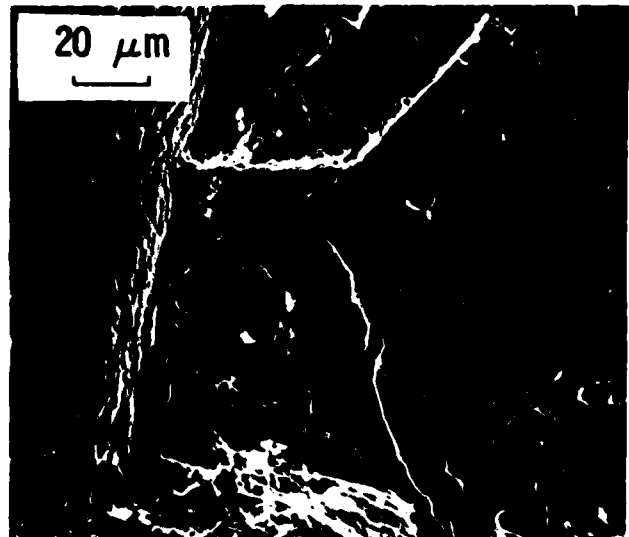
Photomicrographs of matching fracture surfaces near fracture origin "a" in shroud 2-Cf (4).
